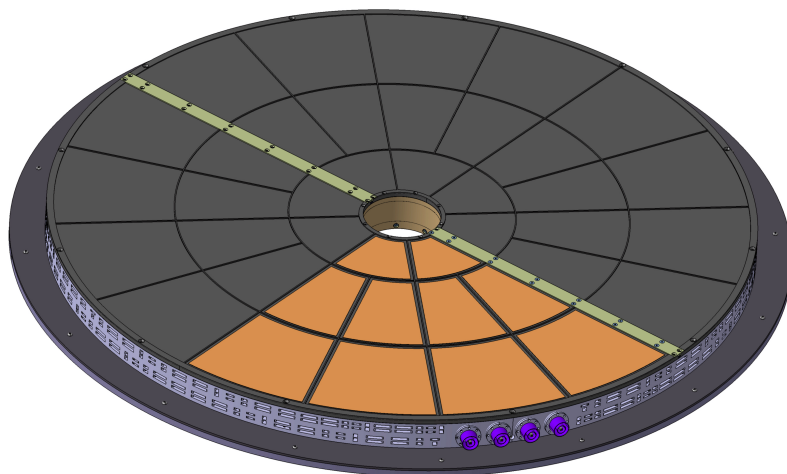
General view of the closed hermetic vessel. The front cover (Kapton heaters partially shown) is made of two parts which are bolted together with composite bracket and tight gasket. The outer ring is holding all electric connectors and coaxial cooling flanges.
